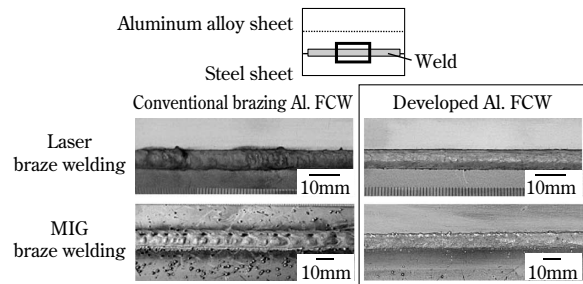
shows the appearances of welds obtained by laser braze welding and MIG braze welding. The newly developed aluminum FCW exhibits a significantly improved bead appearance compared with the conventional aluminum FCW for brazing.
